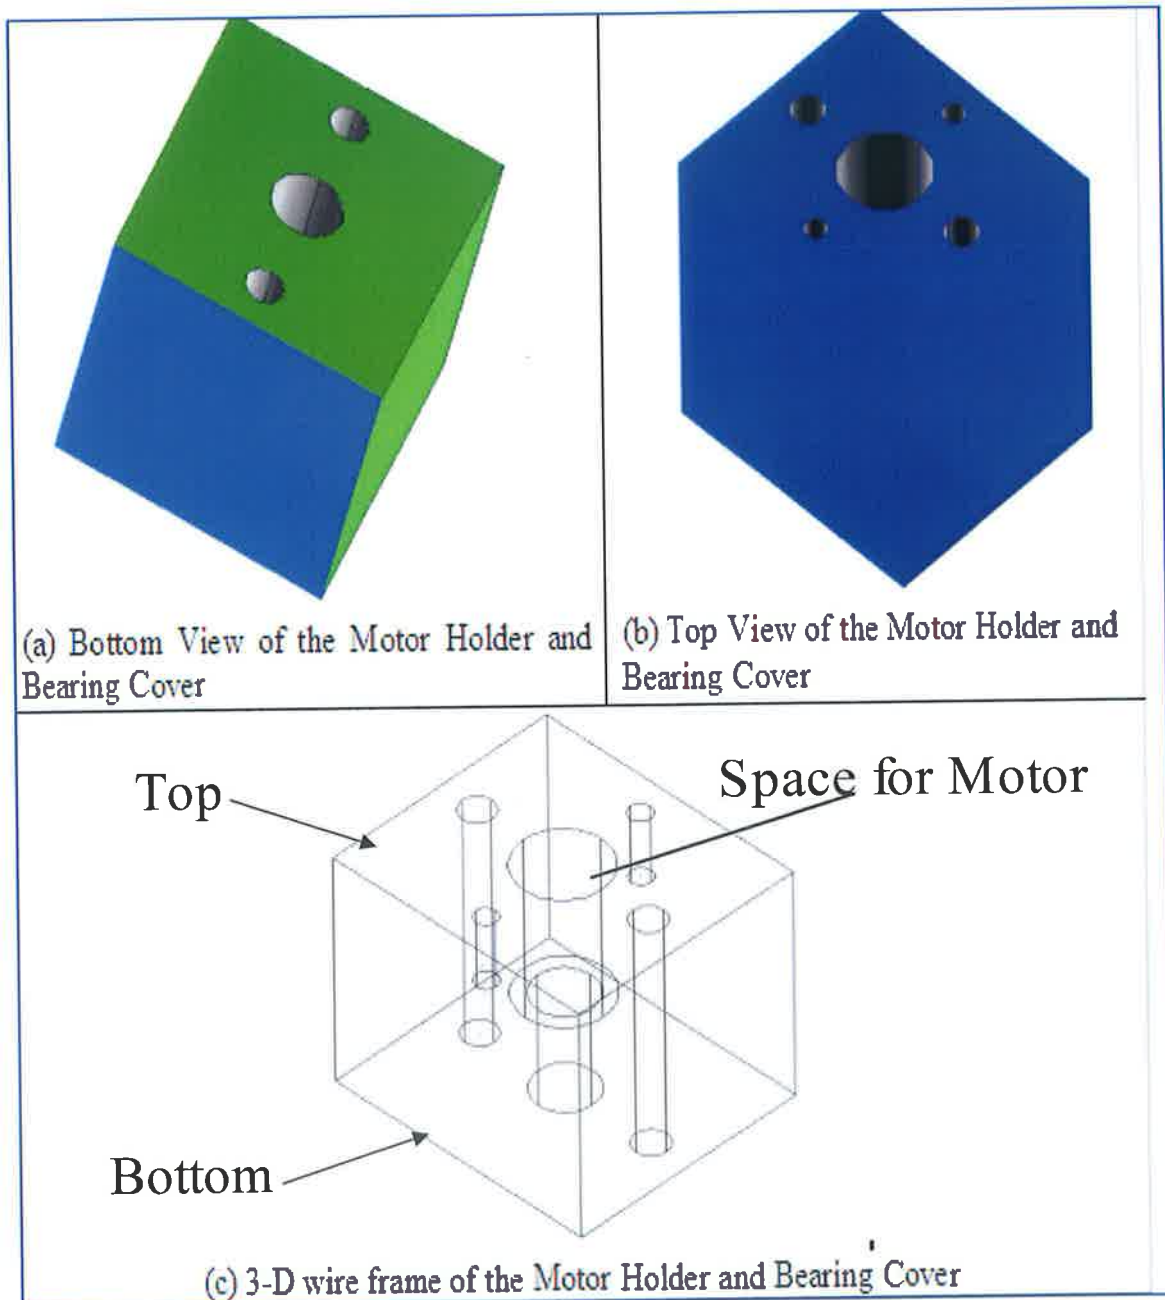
Schematic diagram of the Motor Holder and bearing cover.
